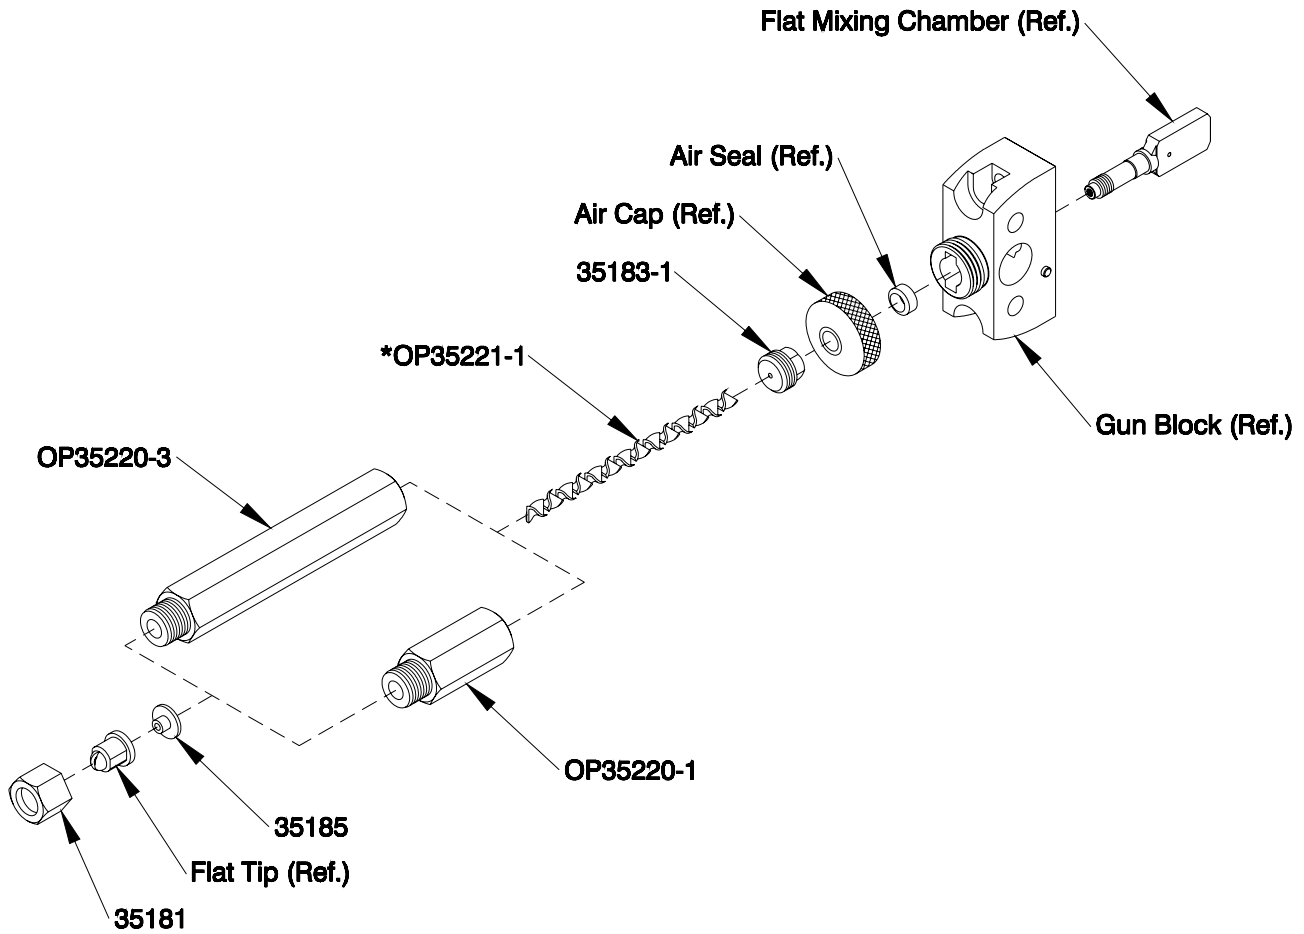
Static Mixer Assembly (Part No. OP35220-1-PKG / OP35220-3-PKG), Exploded View
